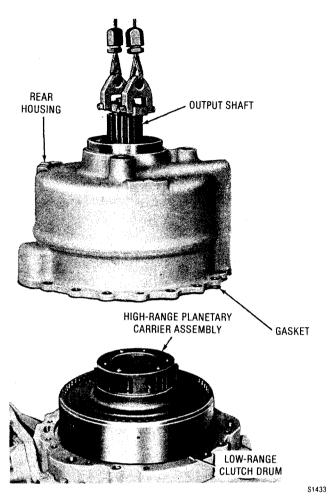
Installing rear housing and attached parts (TRT-3)
